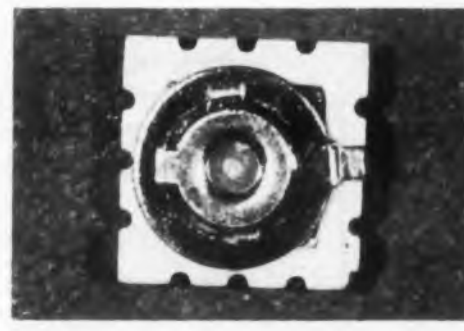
Transistor package with radial leads built for the Micromodule program by Hermetic Pacific, Inc. Hermetic sealing is accomplished by glass-to-metal seals and resistance welding. Because of high yields for welded seals, such as those supplied to the program by Hermetic Pacific and Rheem Semiconductor, these will probably replace the ultrasonic solder hermetic seals in the program.
